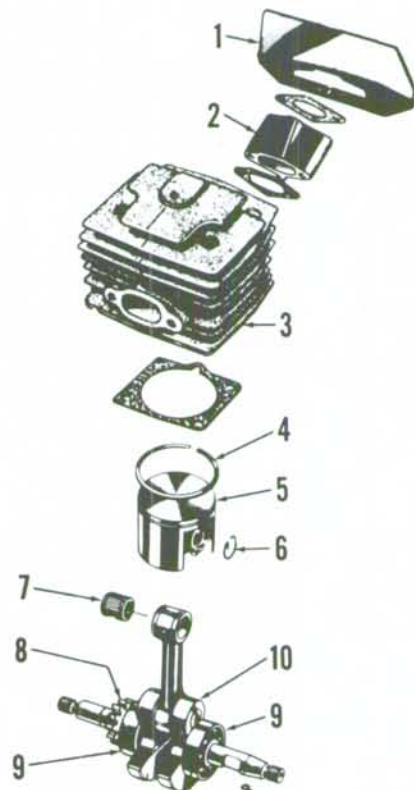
Exploded view of engine. Oil pump drive gear (8) is used on Models 140S, 240S, 240SE and 240SG. Note oil pump gear in Fig. H17 used on all other models.
